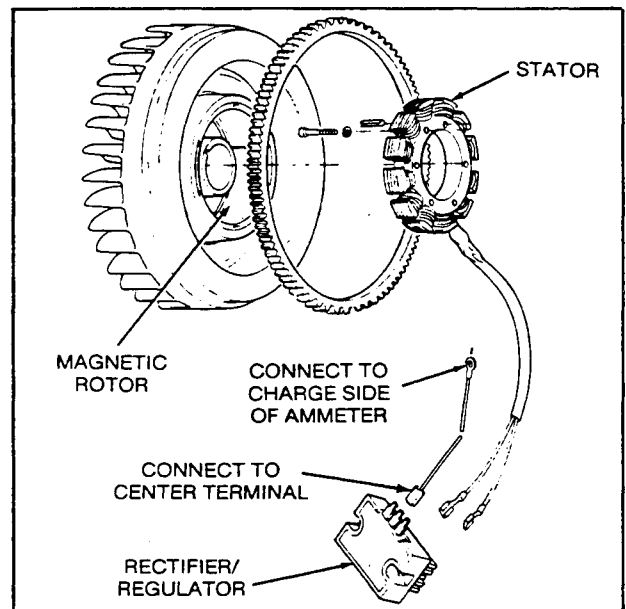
A 30 AMP FLYWHEEL ALTERNATOR
